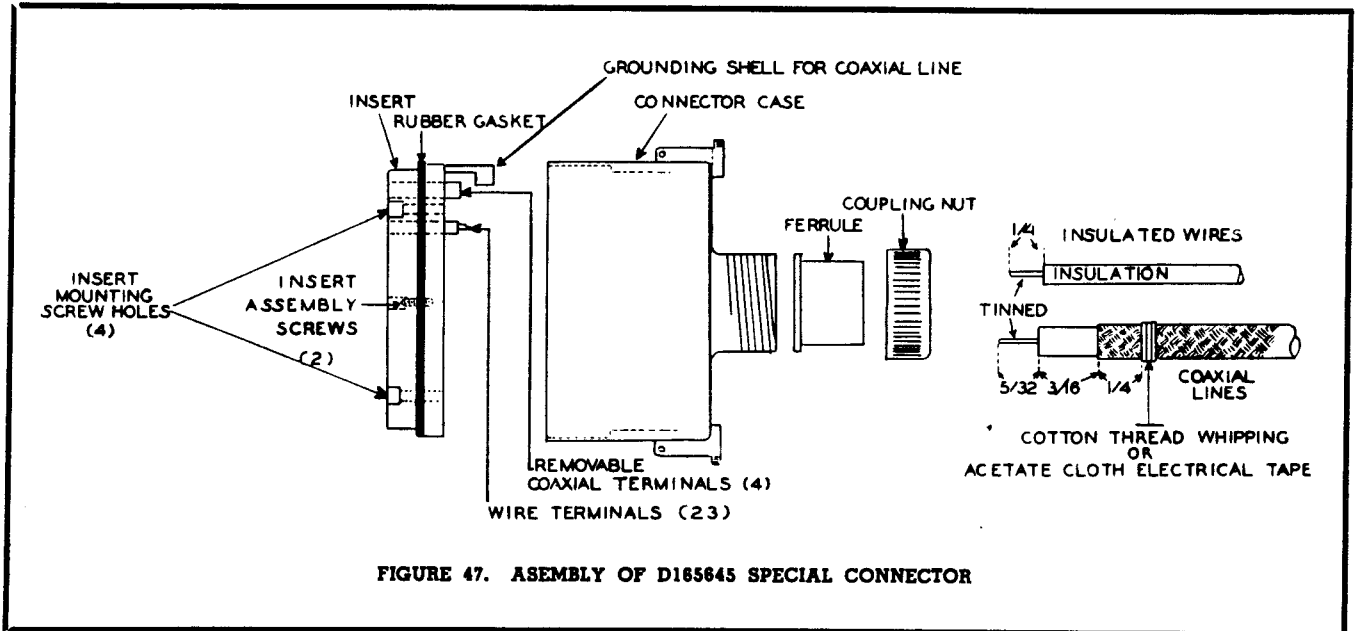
ASSEMBLY OF D165645 SPECIAL CONNECTOR
